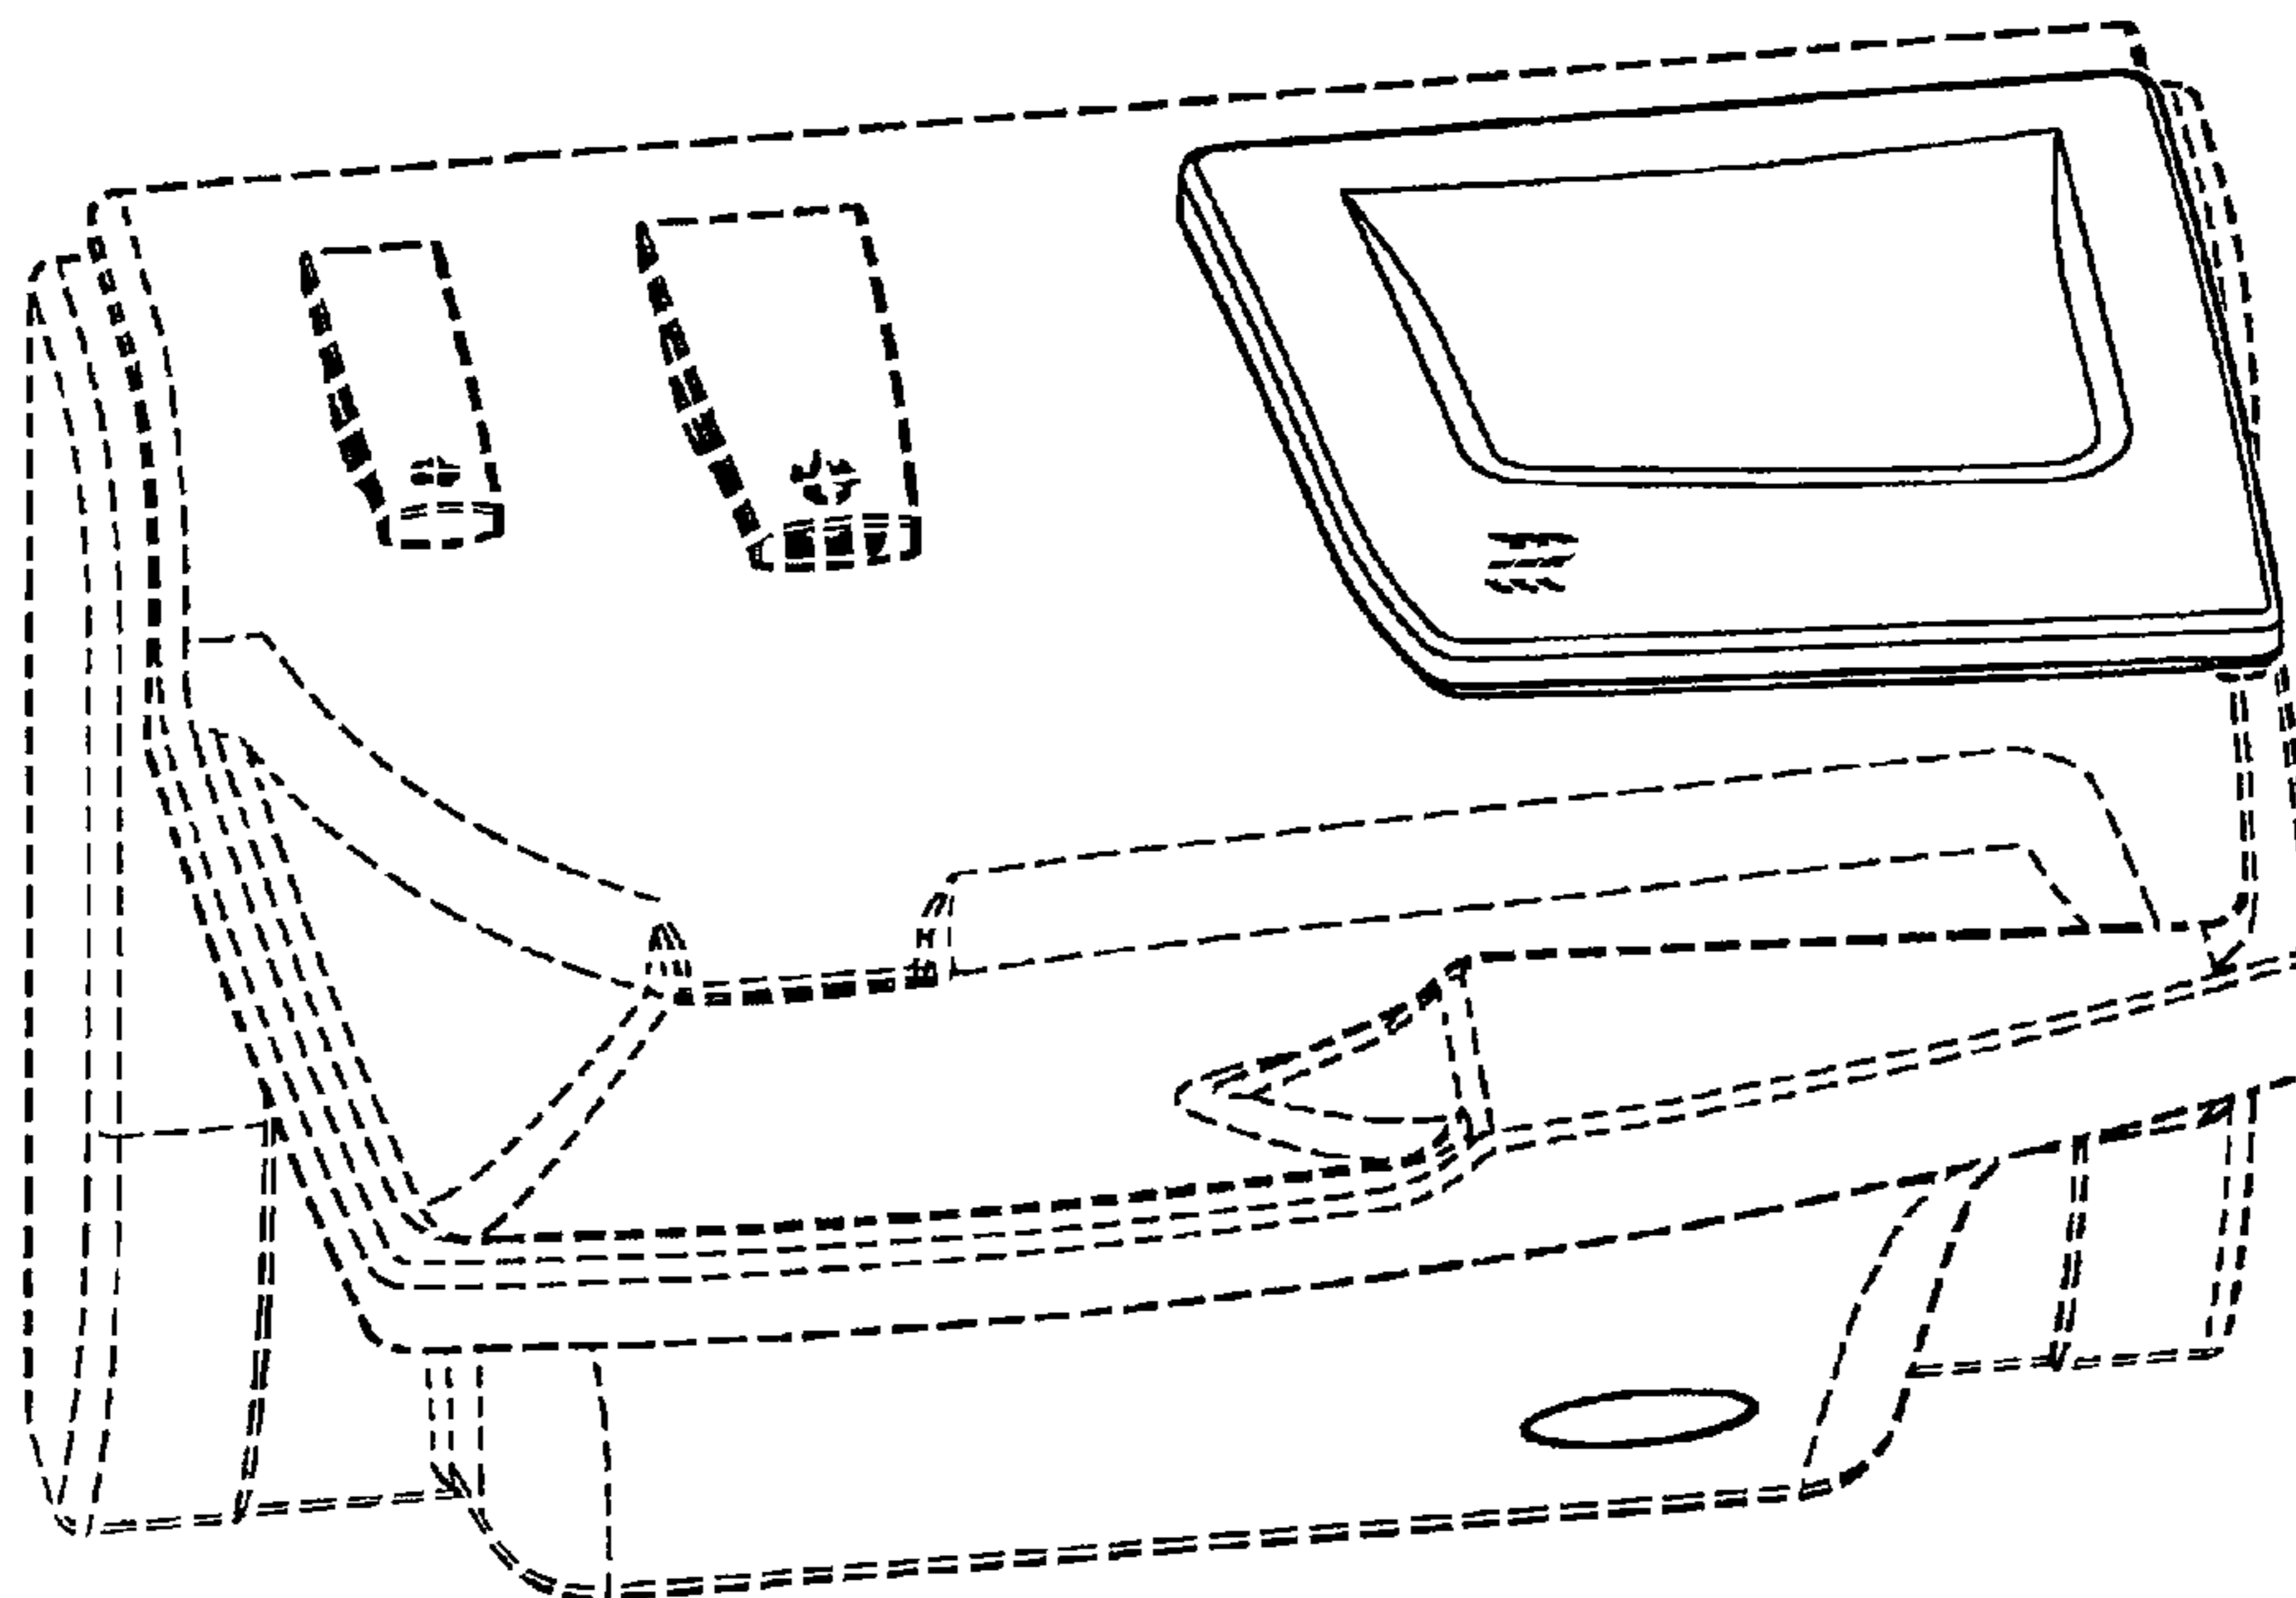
is a front elevated view of the in situ hand dryer hood
